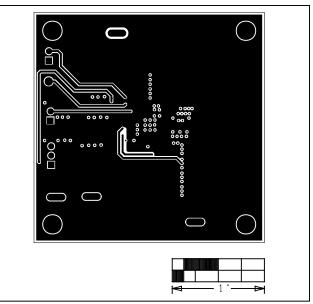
MAXM17503 EV Kit PCB Layout—PGND Layer 3
